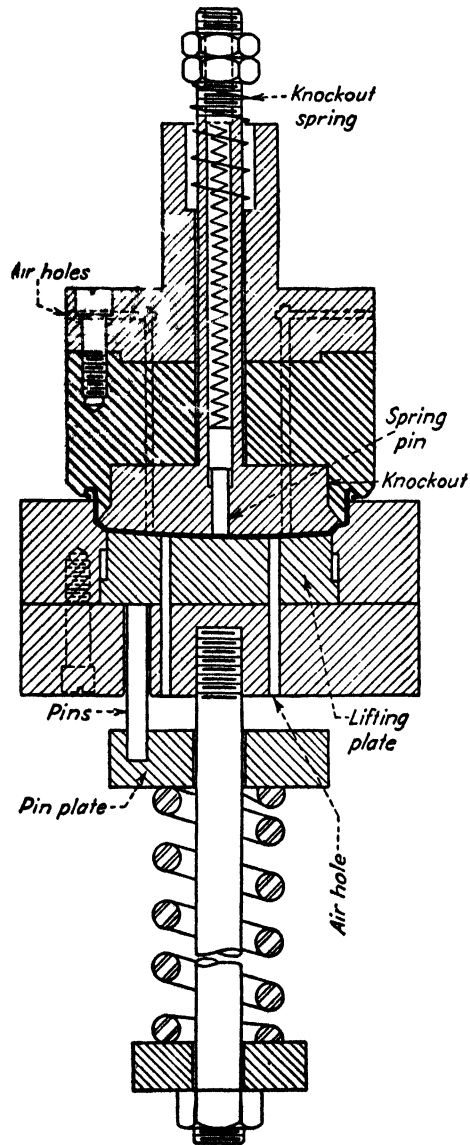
Second-operation die forms an outward curl on exterior flange of can cover. Grooving the punch permits feeding the formed cover open end up.
